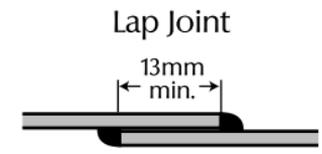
Typical joint designs for Braze welding of copper.
